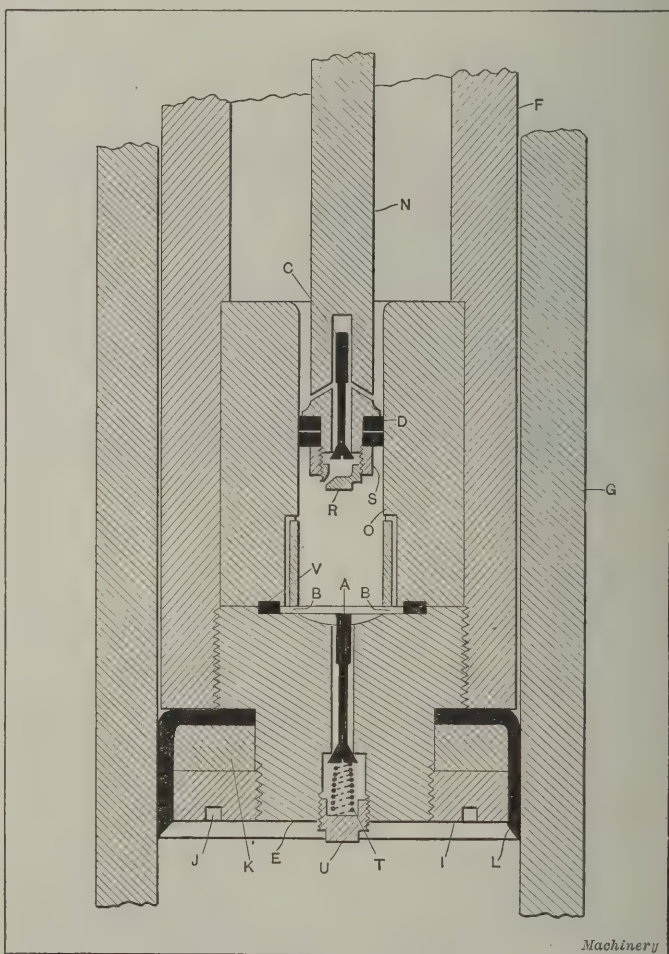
View of the Principal Working Parts of the Jack shown in Fig. 1
